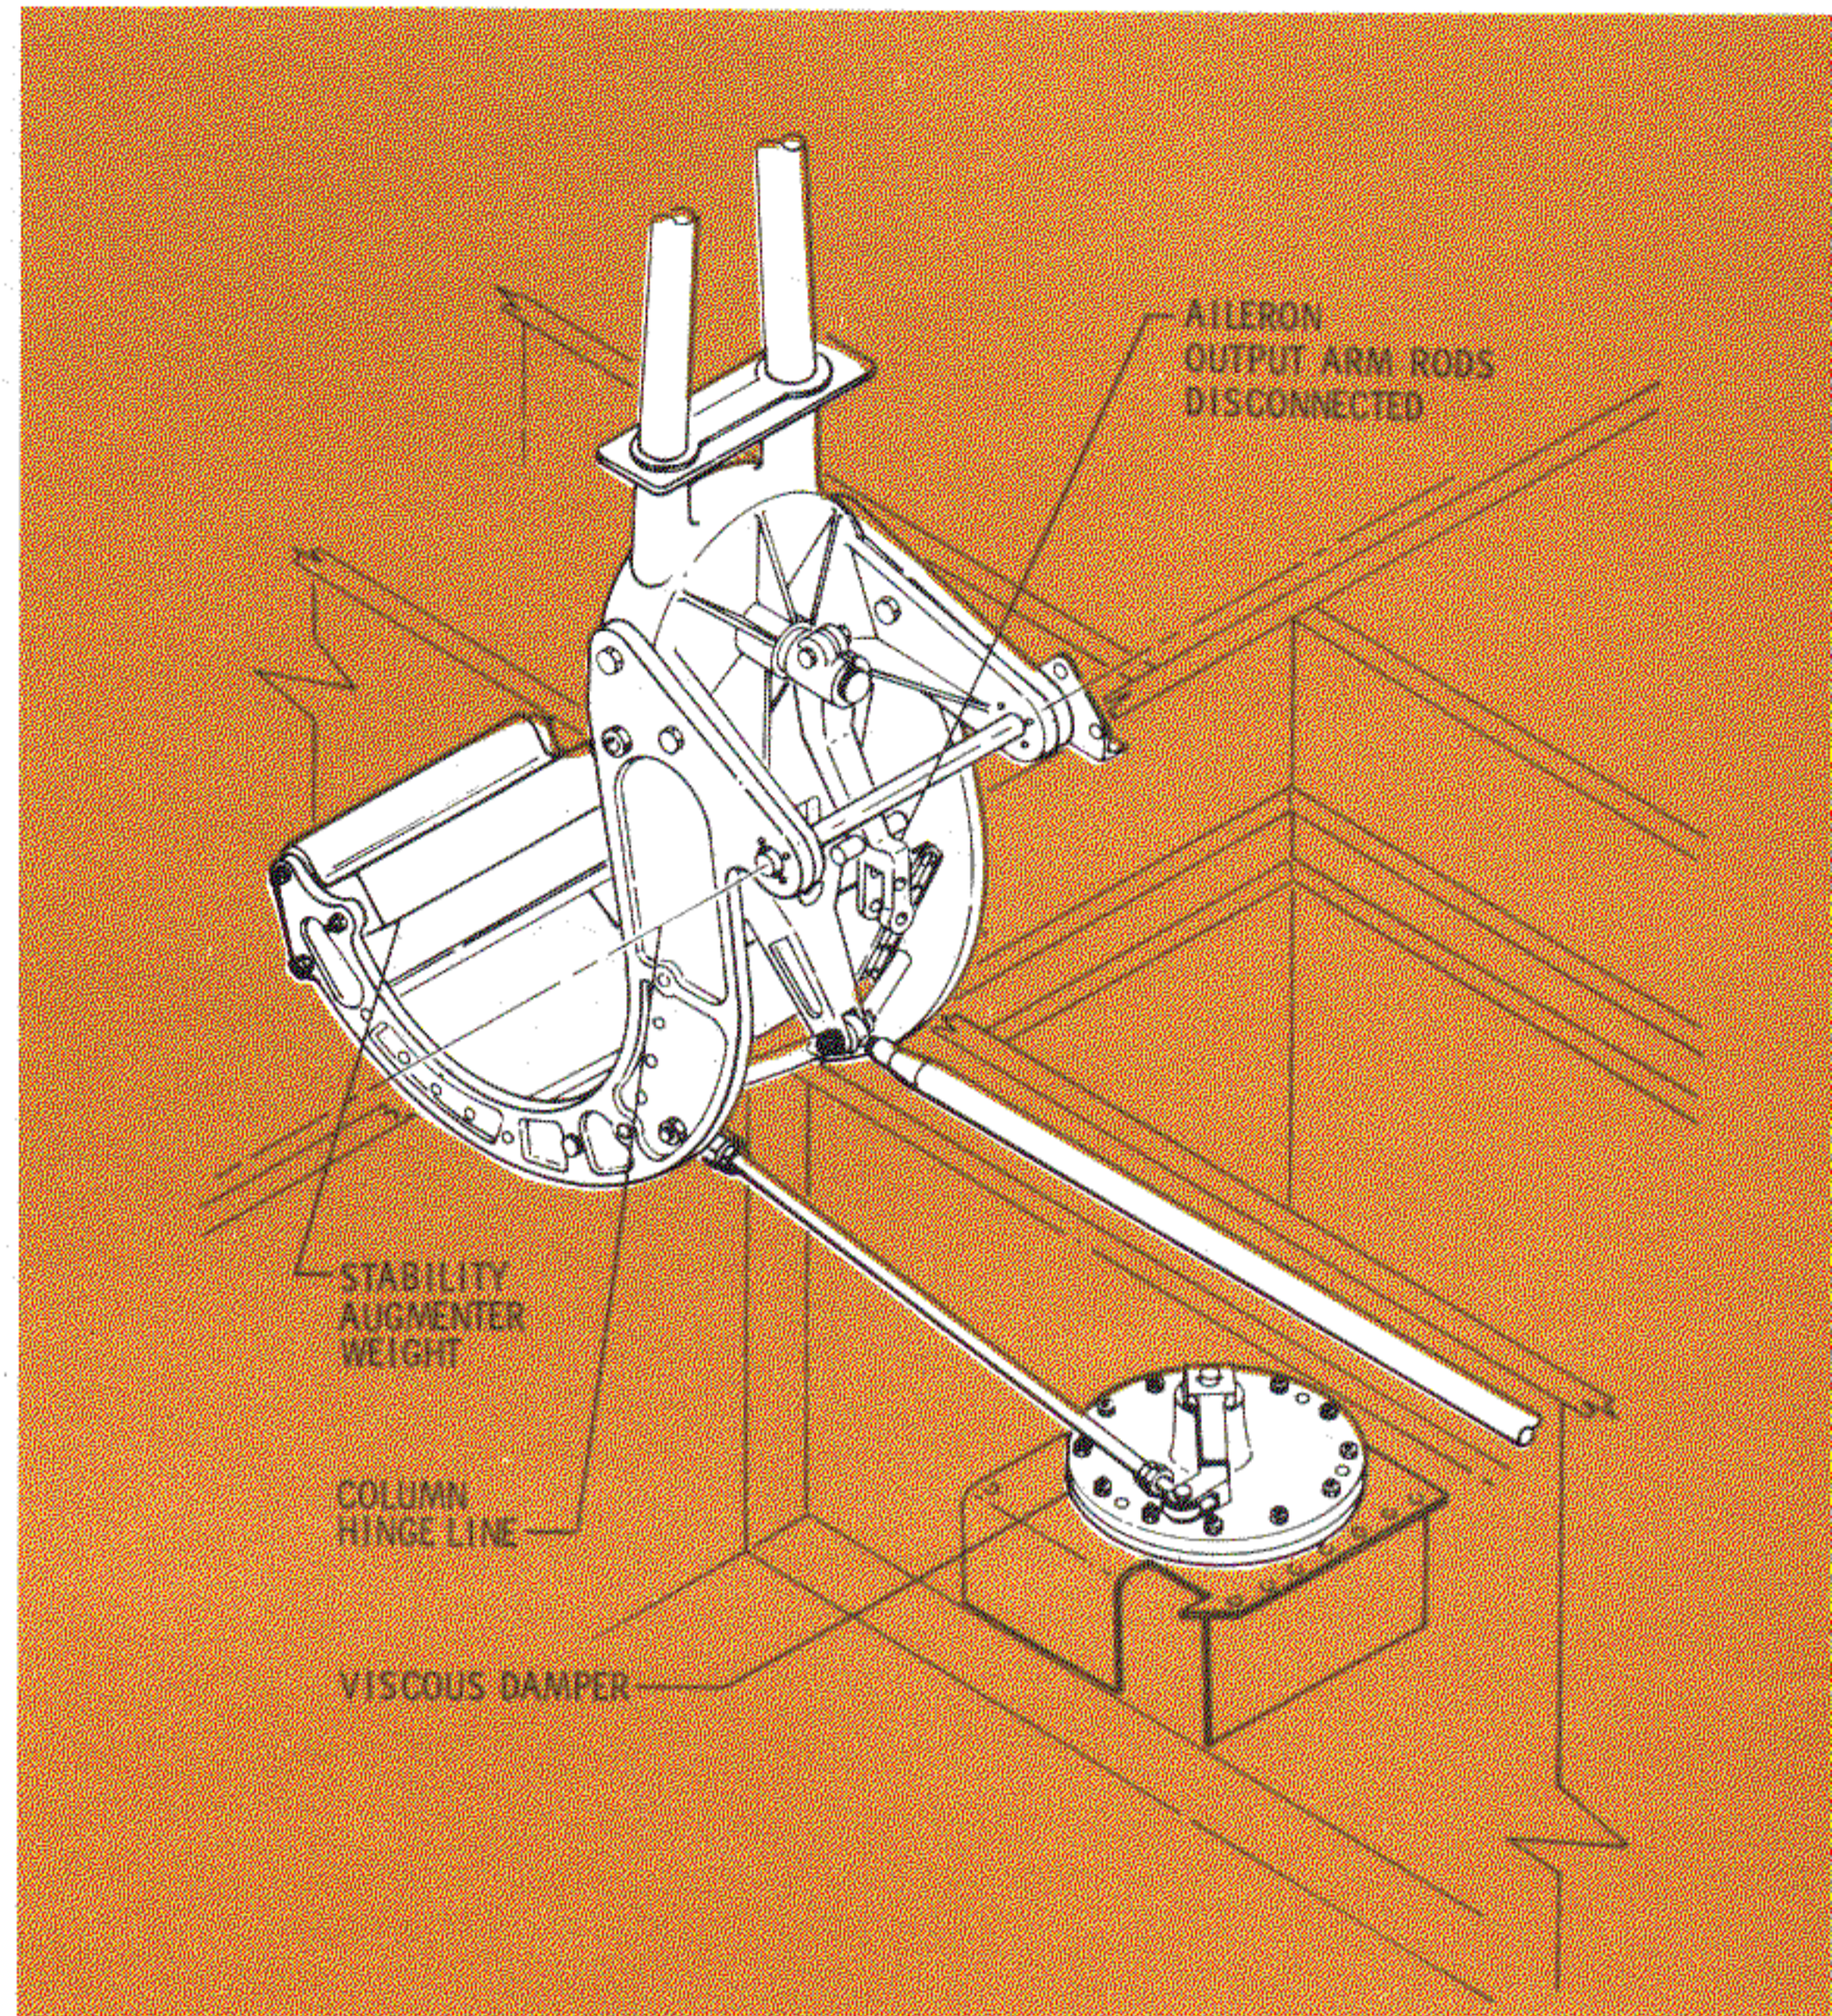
Detail of Viscous Damper Installation to Copilot's Control Column
